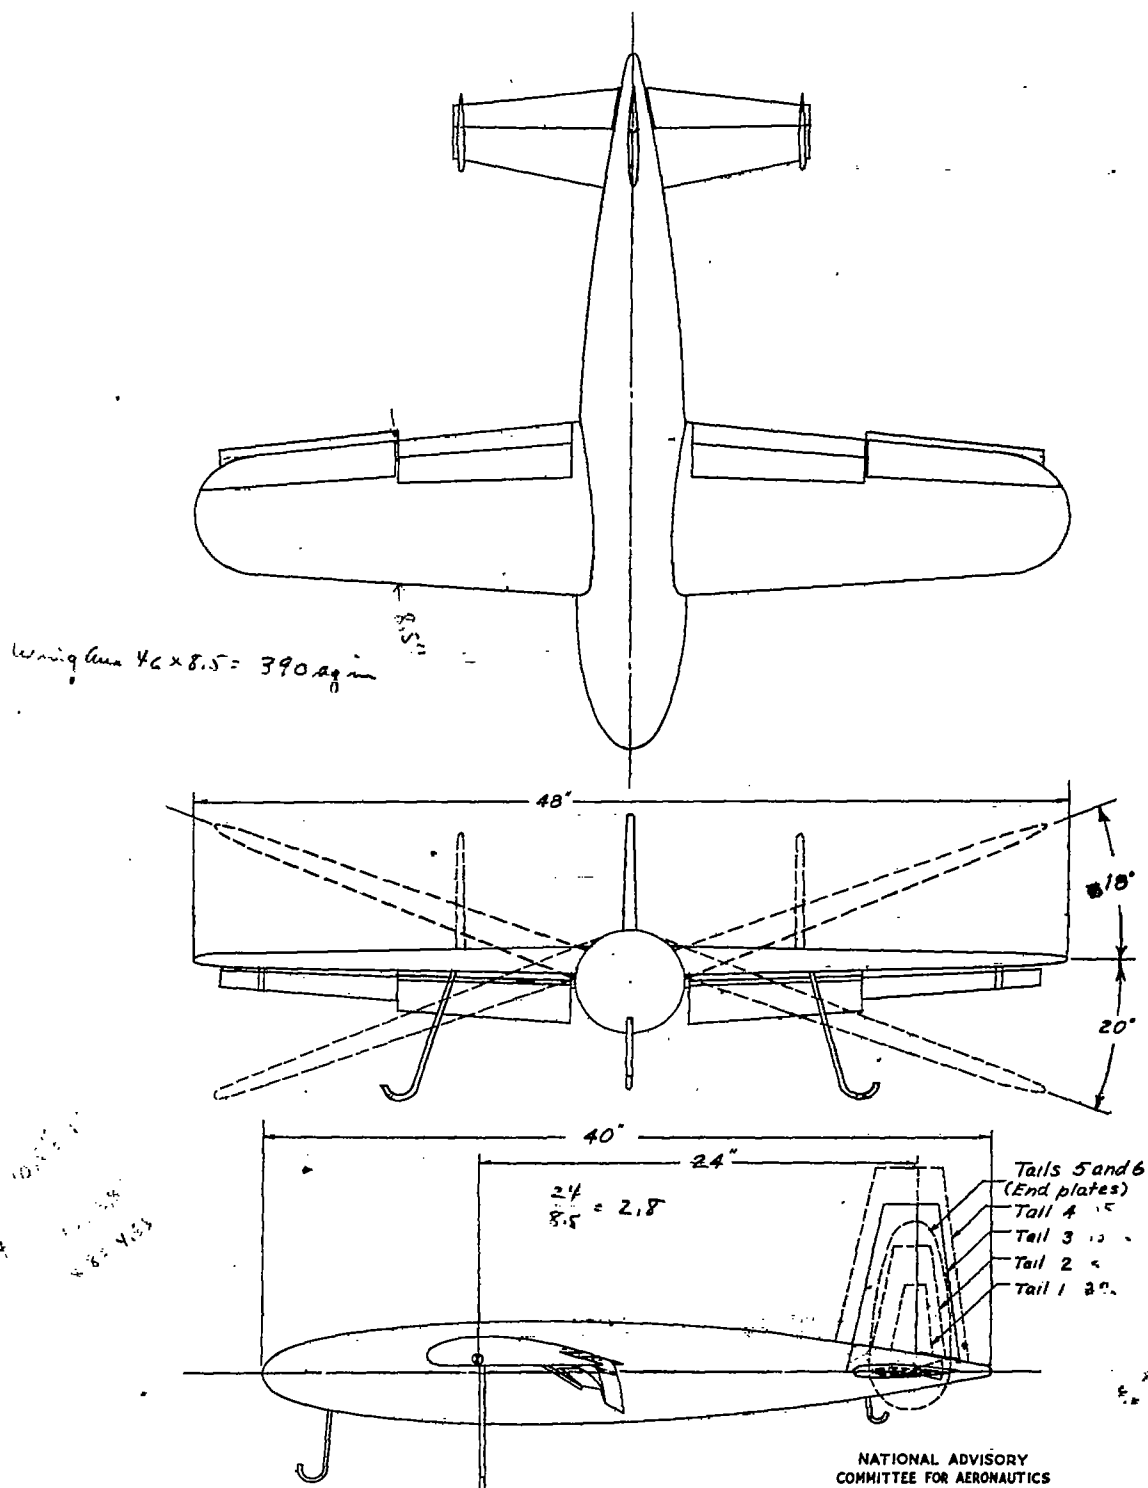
Three-view sketch of model tested in Langley free-flight tunnel showing range of dihedral adjustment and alternate vertical-tail arrangements.
